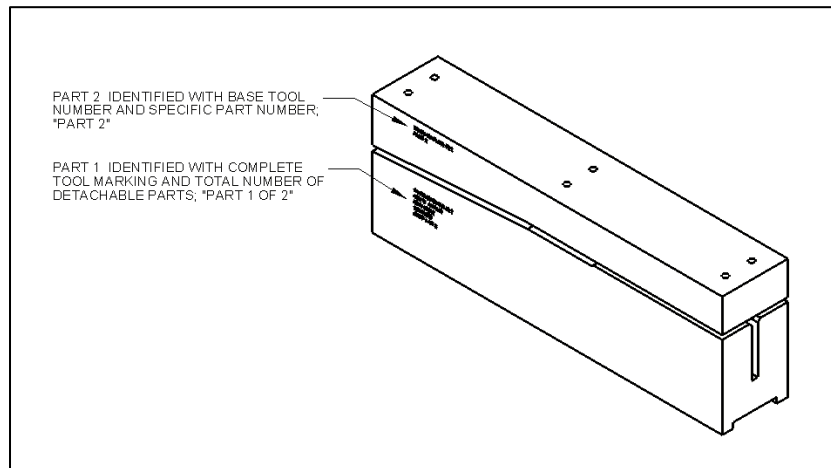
MULTIPLE PART, NON-DESIGN TOOL
